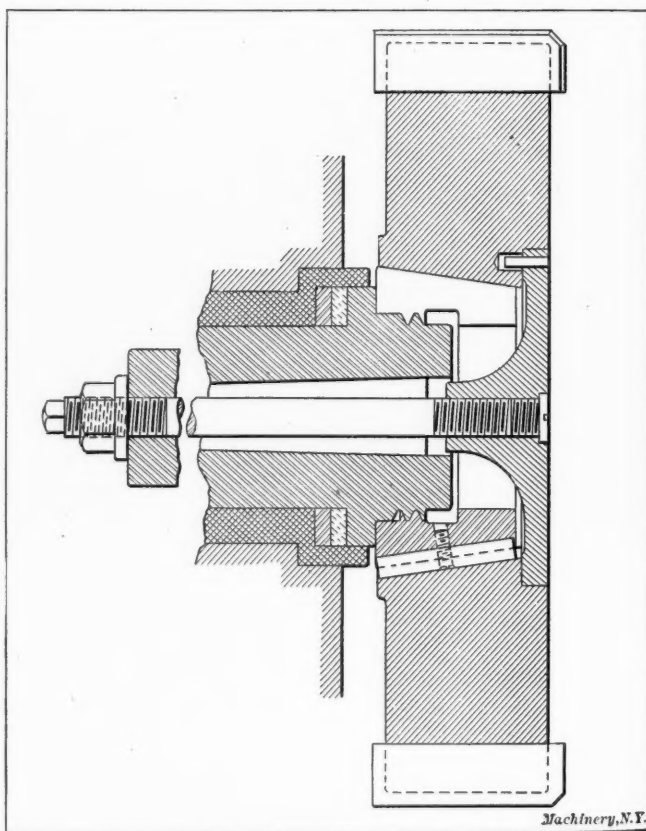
Section through Milling Cutter Mounted in Place on Spindle Nose
